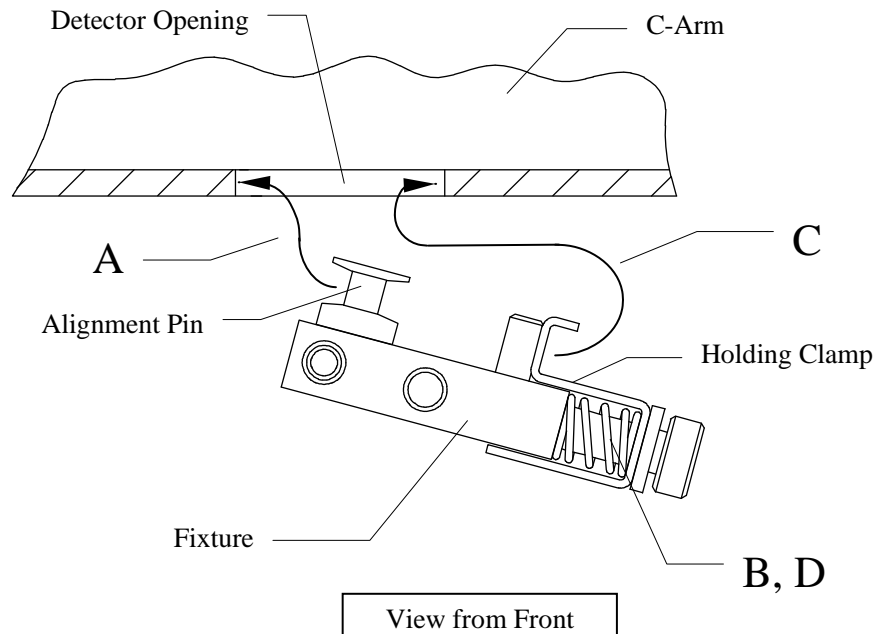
X-Ray Alignment Fixture (TLS-00080)
